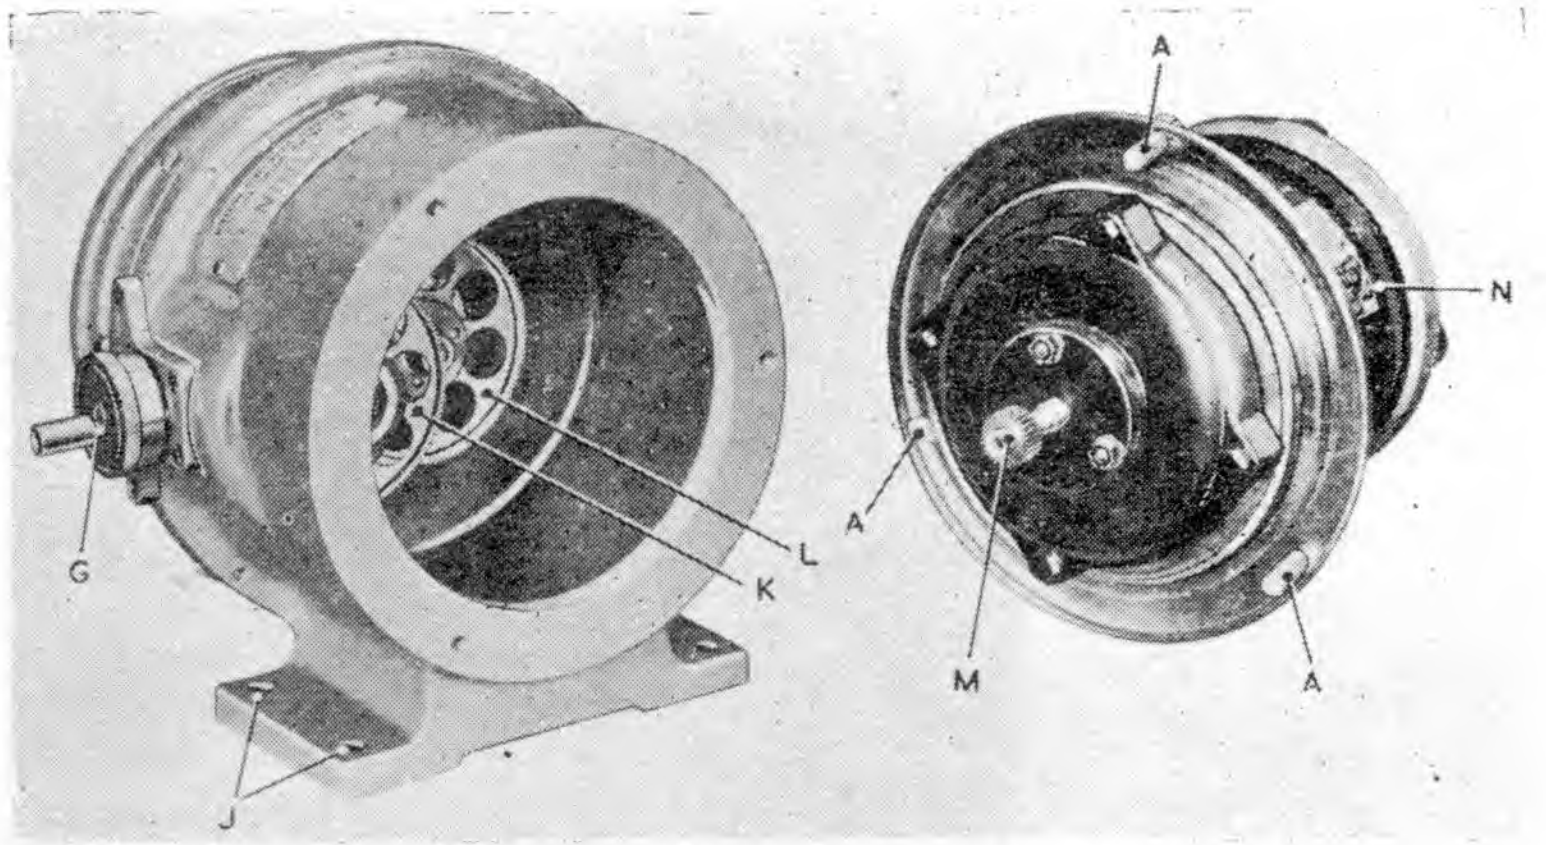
Resolver unit (magslip)—selsyn coupling and gearbox
